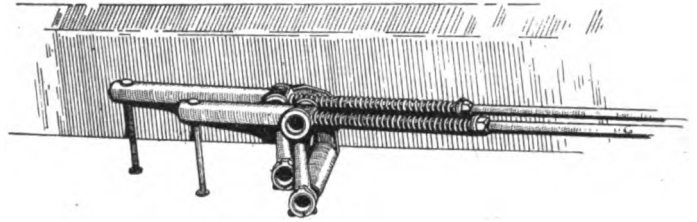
OUTSIDE BRAKE ADJUSTMENT
